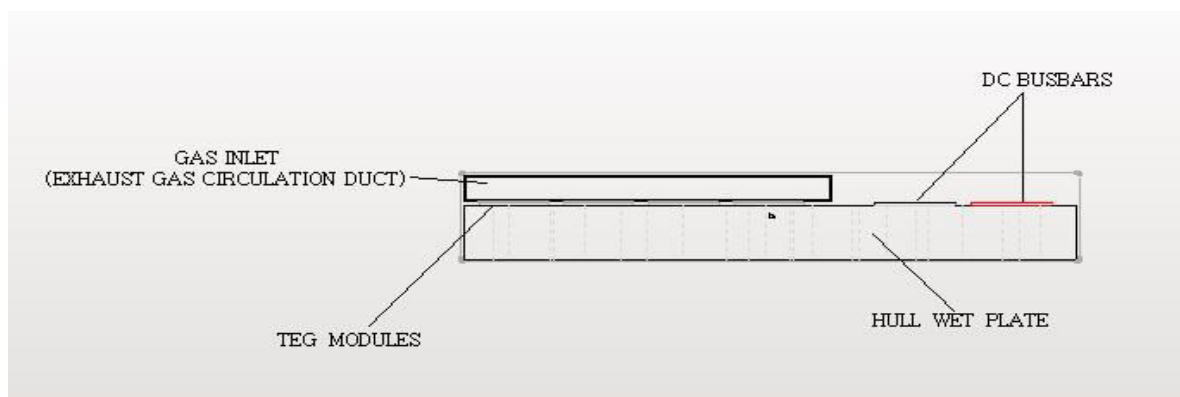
Cross-Sectional cut of the TEG array assembly attached to the Hull plate.
